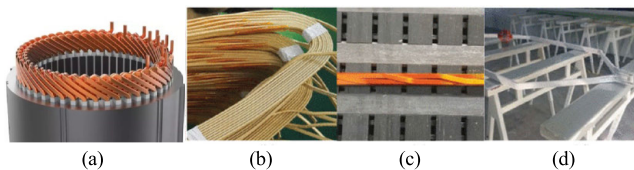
Winding type. (a) Flat wire winding. (b) Formed winding. (c) Transposition winding. (d) Formed transposition winding.
